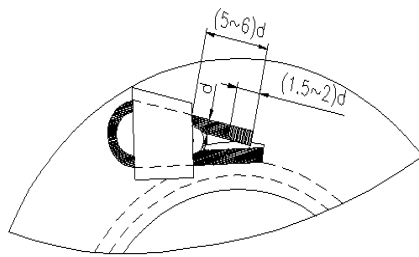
The end of drum wedge connection Fig. 6-51b The end of jib end wedge connection
